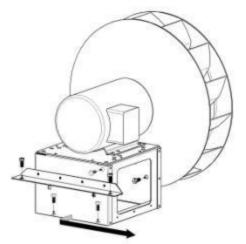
Bolts which Connect Motor Mount to Blower Fan
